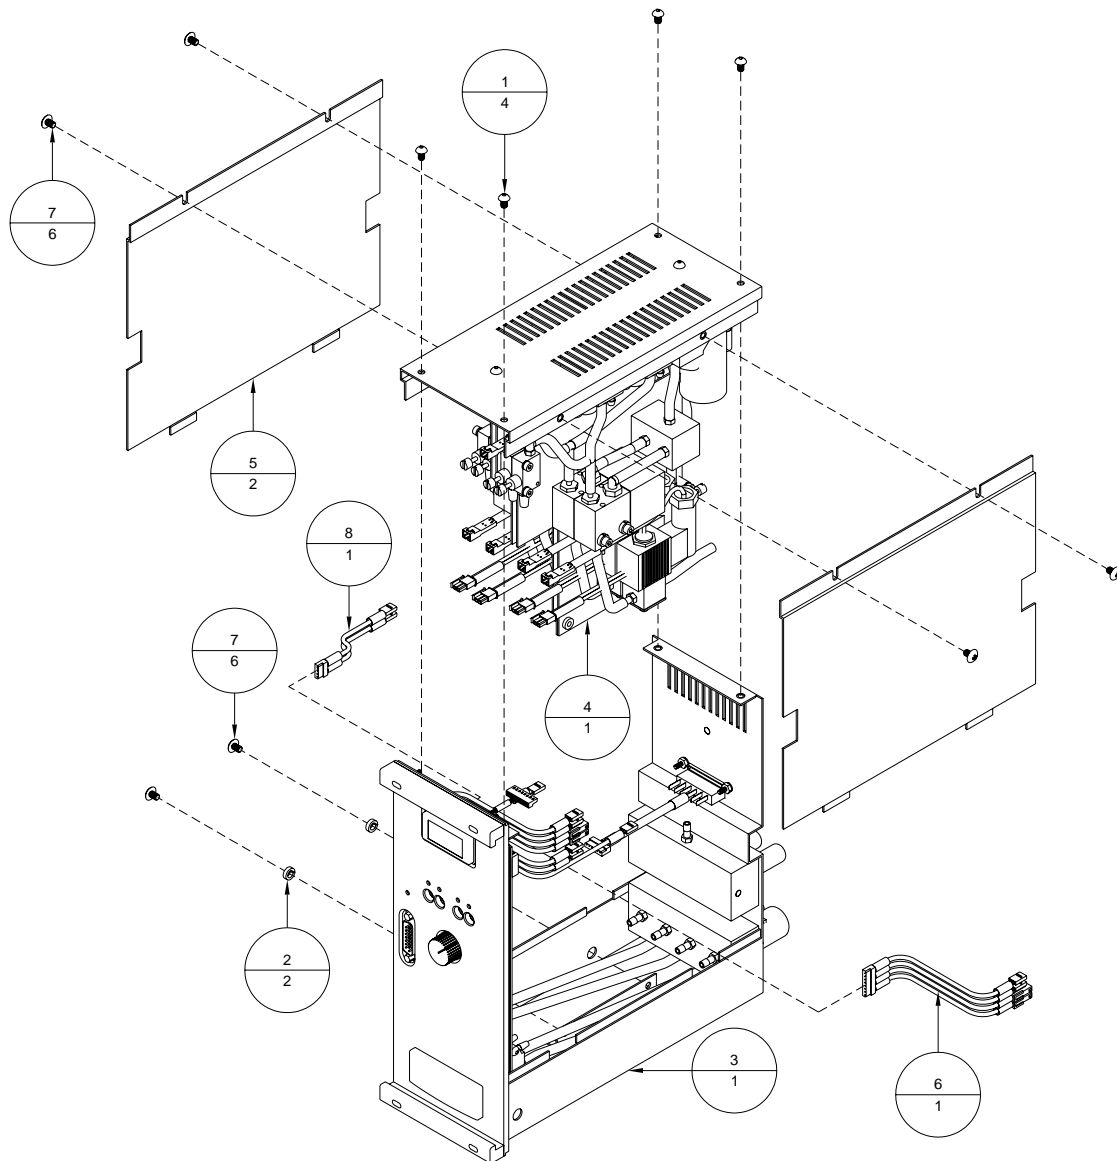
Pressure Regulator Assembly, 4-Head (9101866A)
